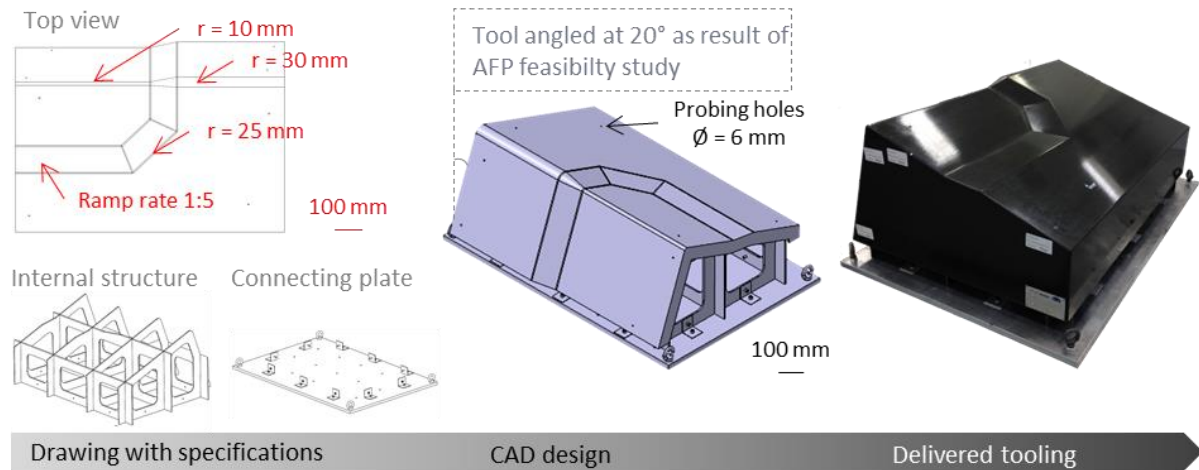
Tooling details of the demonstrator from drawing through to the manufactured tool
